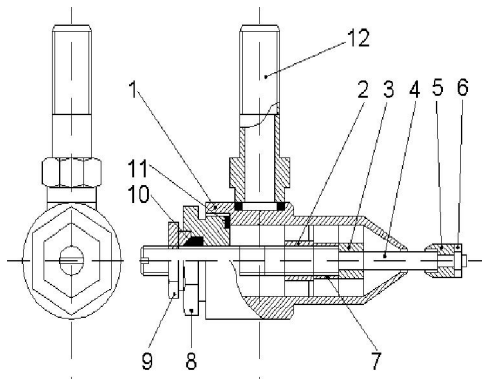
The sonic generator scheme: 1-air nozzle; 2,3-cross support; 4-rod; 5-resonator; 6-screw-nut M2,5; 7-sleeve; 8-cover; 9-locking nut; 10-gasket; 11- ring; 12-fitting.
